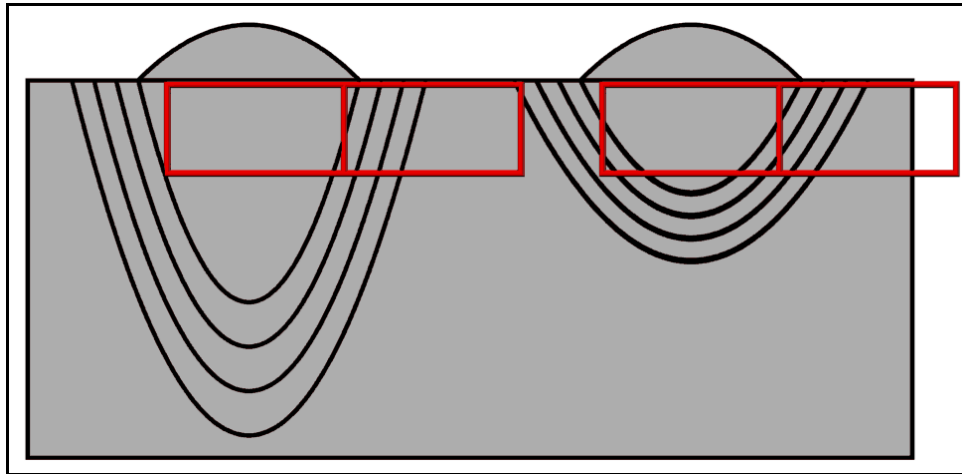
Weld Bead Fusion Line Slope and CVN Specimen Notch Placement
